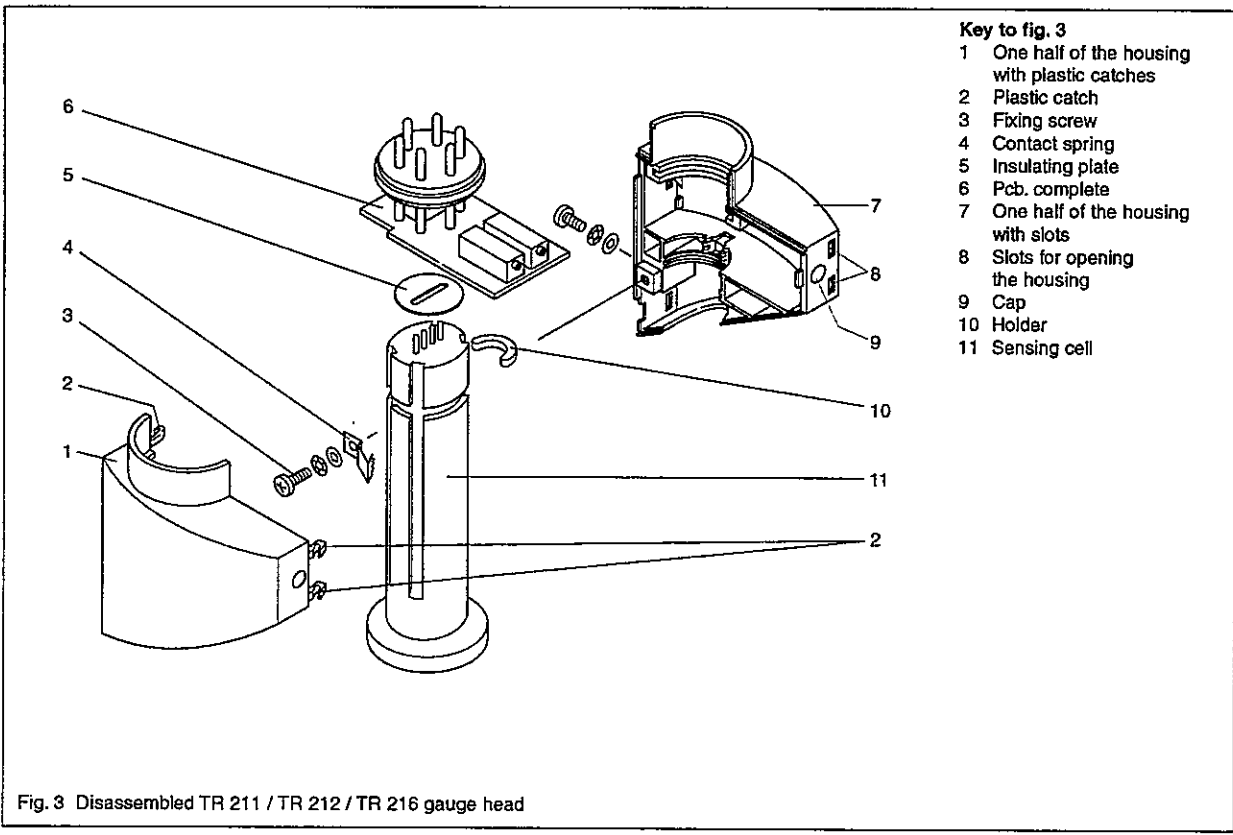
Disassembled TR 211 / TR 212 / TR 216 gauge head
